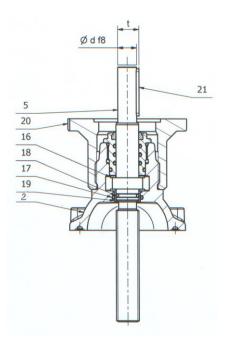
Gate valves adapted to electrical motor according to ISO 5210
